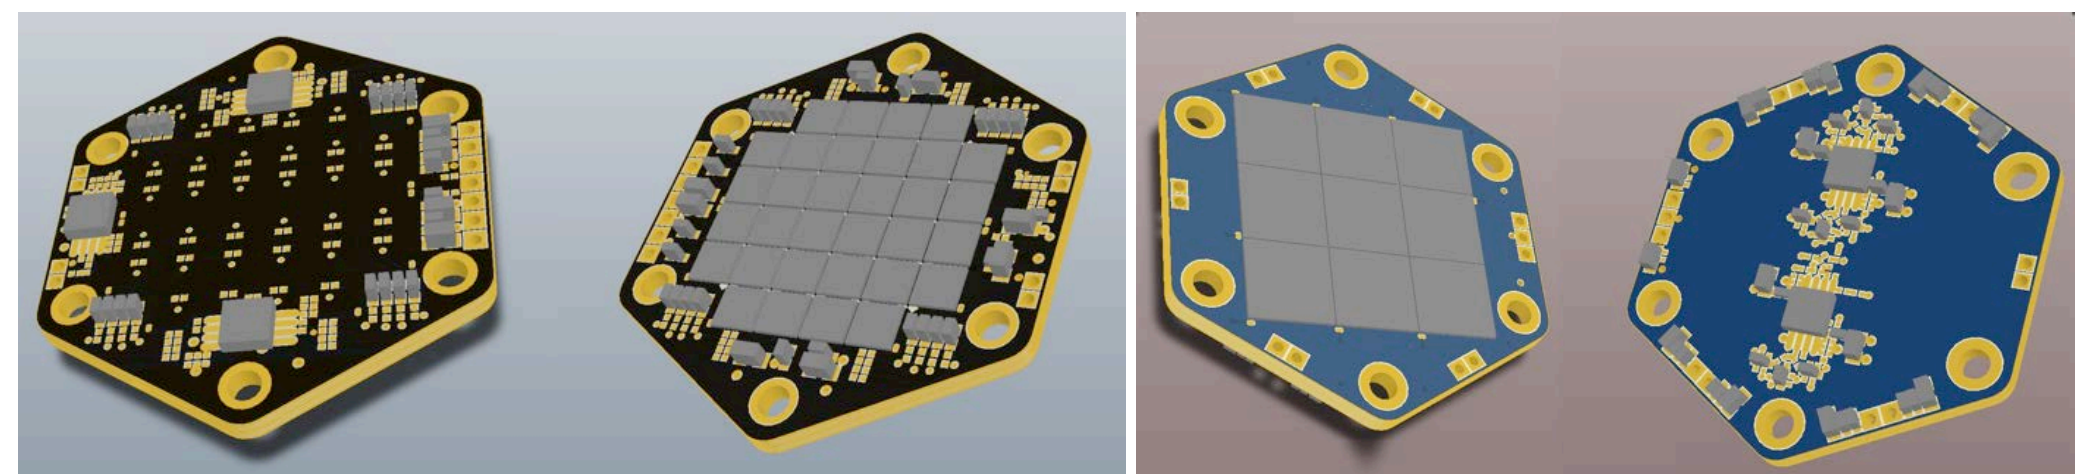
Layout for a 32 3x3 mm and a 9 6x6 mm pixel PCB.
